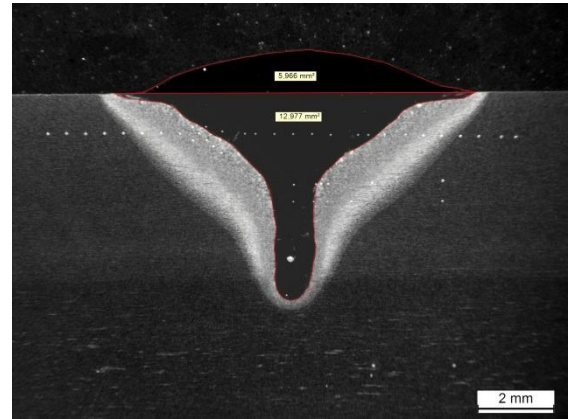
LAHW welded sample 3.5.2-9.
